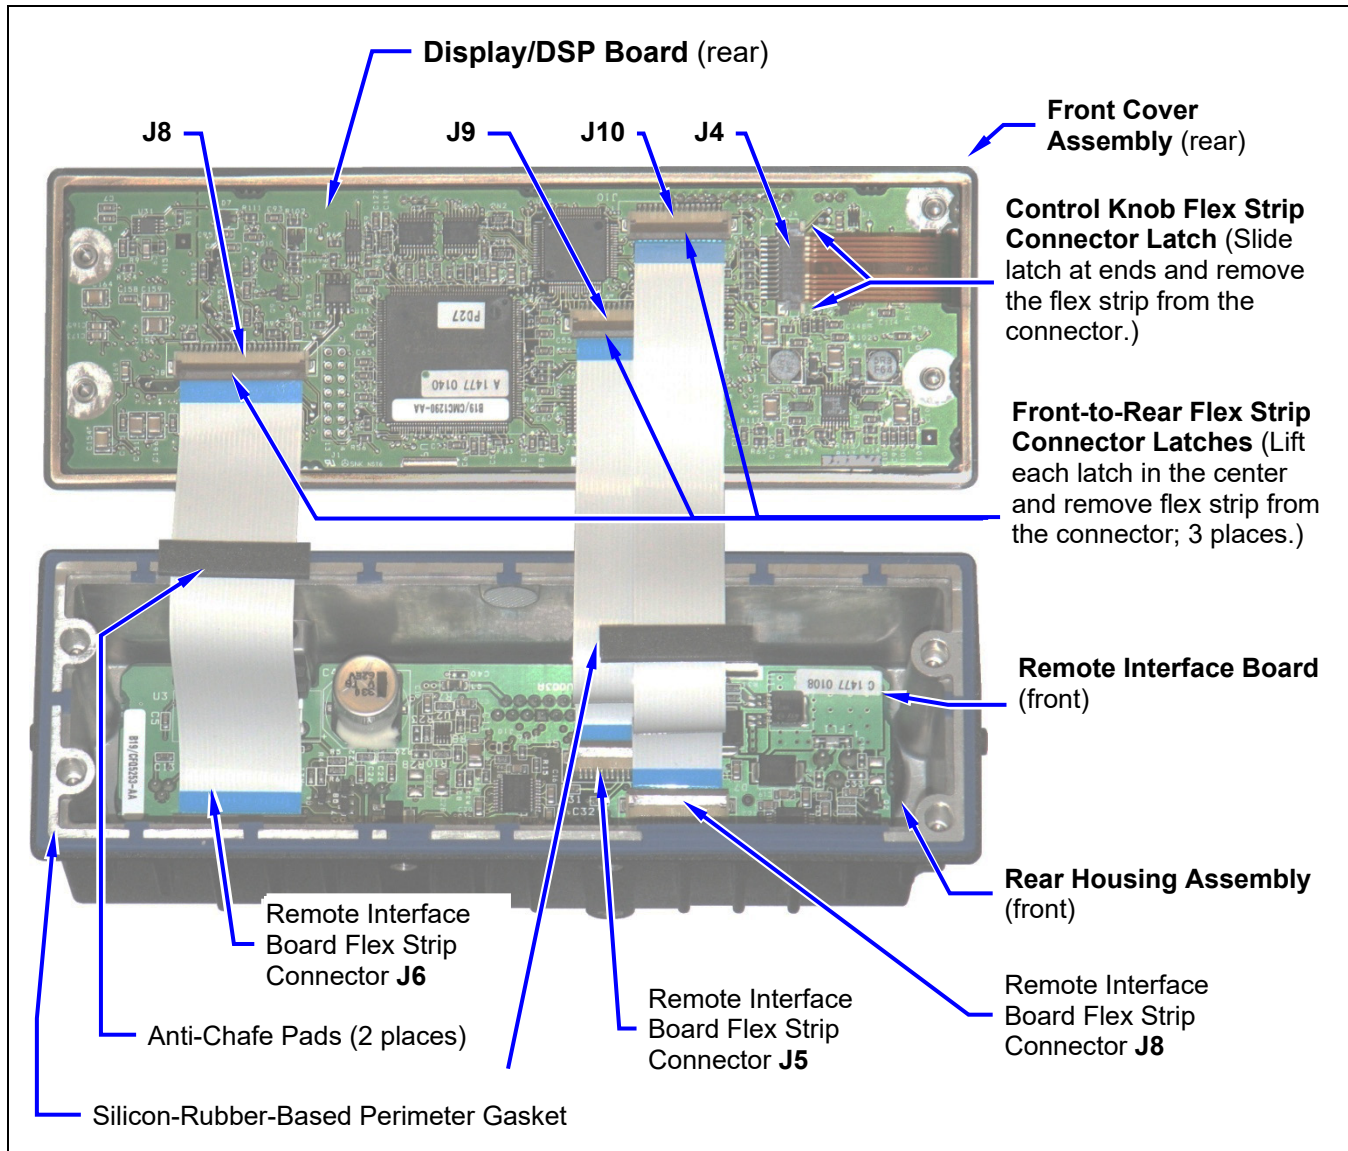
Separating/Mating Front Cover Assembly and Rear Housing Assembly (Disconnecting/Reconnecting Flex Strips)
